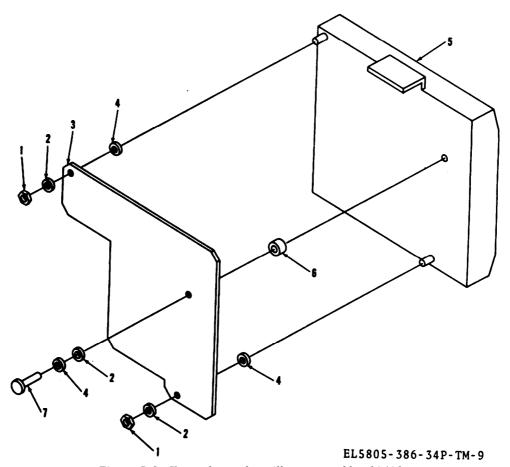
Keysender and oscillator assembly, 1A4A1.
